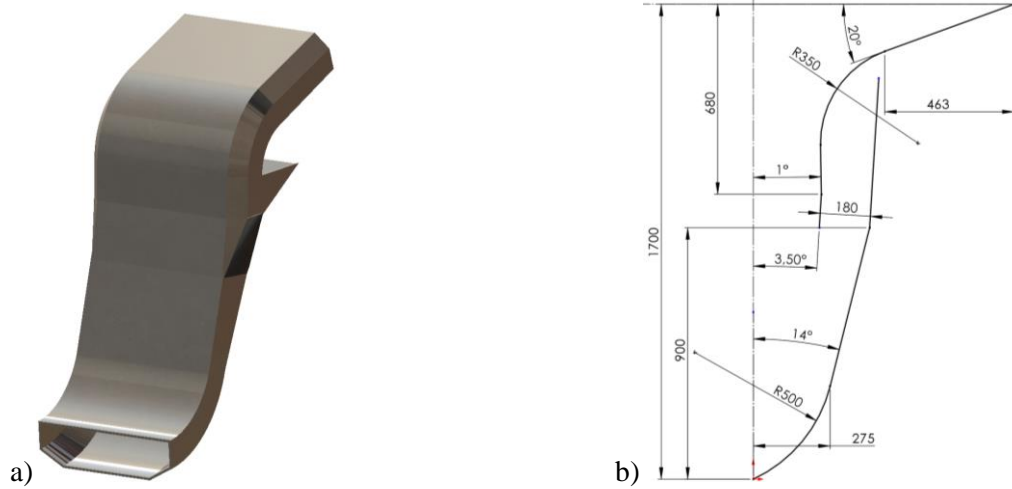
a) 3D model of the new conveyor belt transfer chute; b) Dimensions of the new conveyor belt transfer chute given in millimetres [25].
